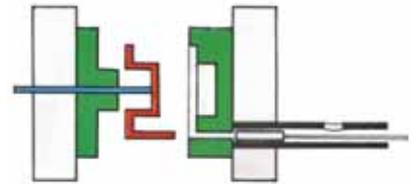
When the molten metal has solidified, the die opens and the casting is ejected.
